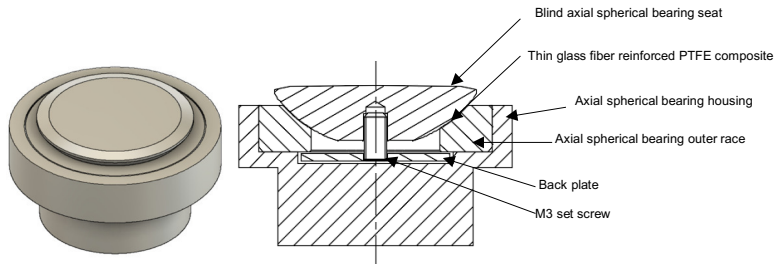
Self-alignment attachment for the compression tests as isometric view (left) and section front view (right)
